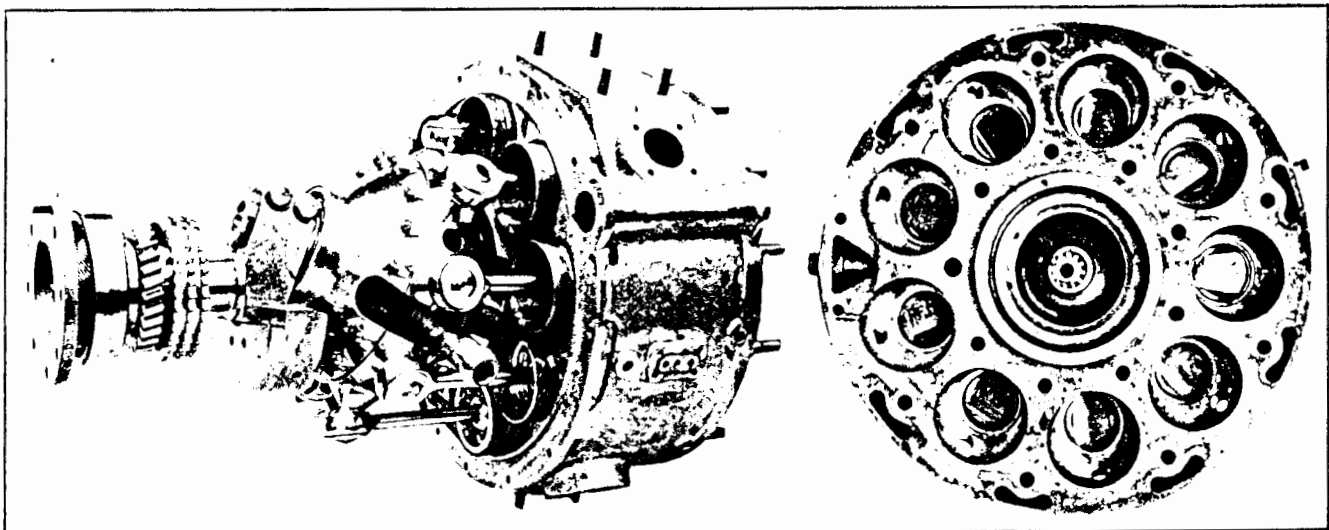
Wobble plate assembly, Type R.R.3 Bristol engine.
